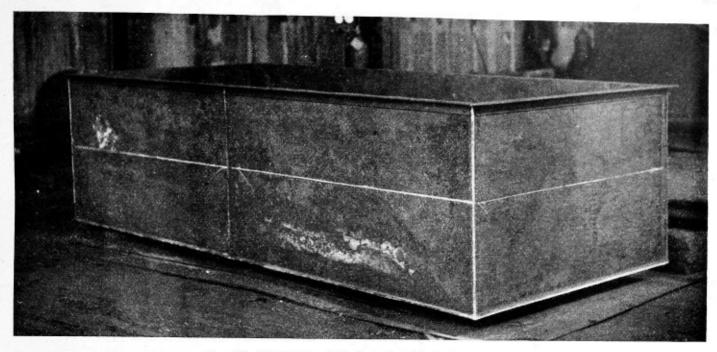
3,000-Gallon 1/4-Inch Tank; Welded Ridge Joints
